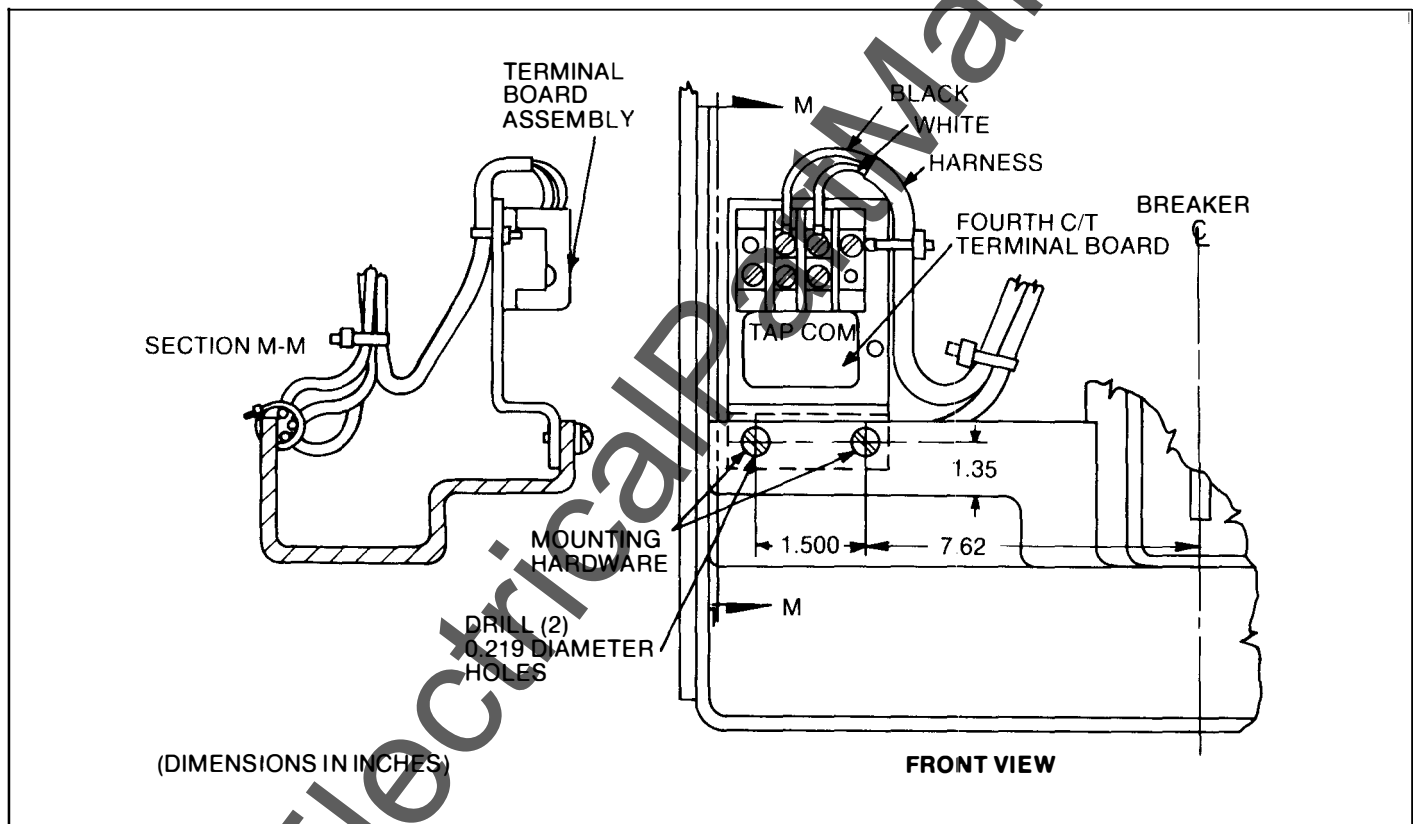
4th-wire terminal board installed — AK/AKS-50 stationery
